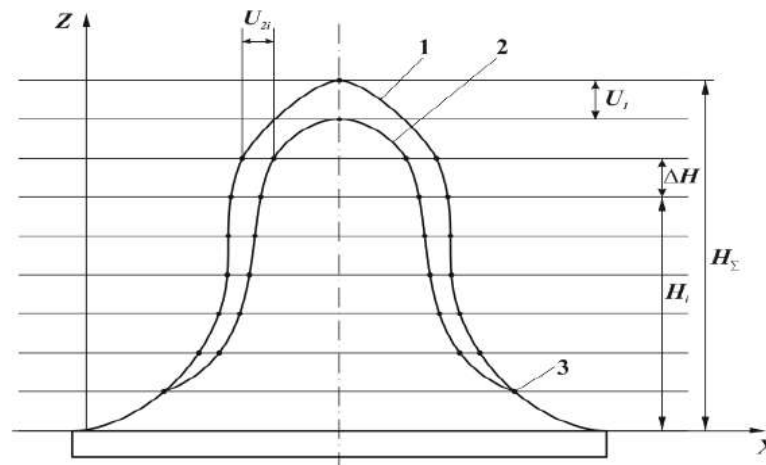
Profiles of cutting surfaces of cutting inserts
